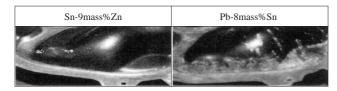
Corrosion of welded seam of real tank after 120 cycles of CCT
